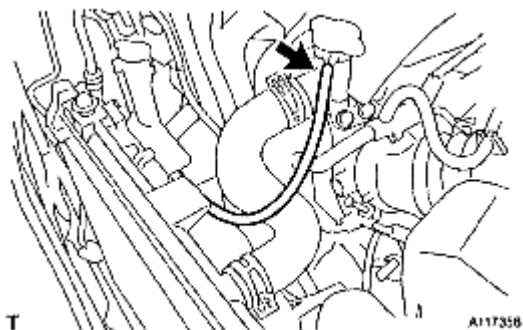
Locating Radiator Reservoir Tank Hose From Water Filler
